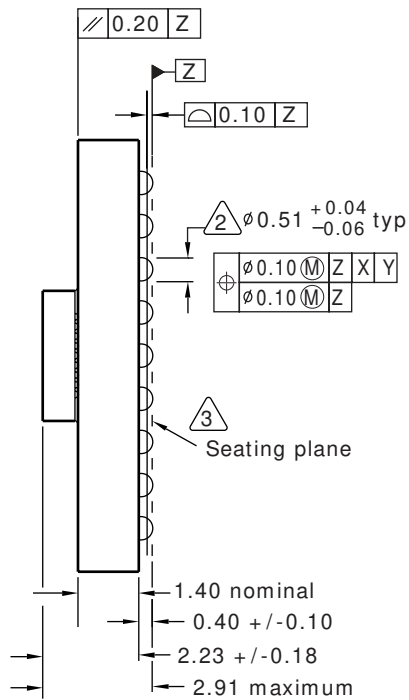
Package Drawing for 69-Pin CBGA (VP and XVP)
